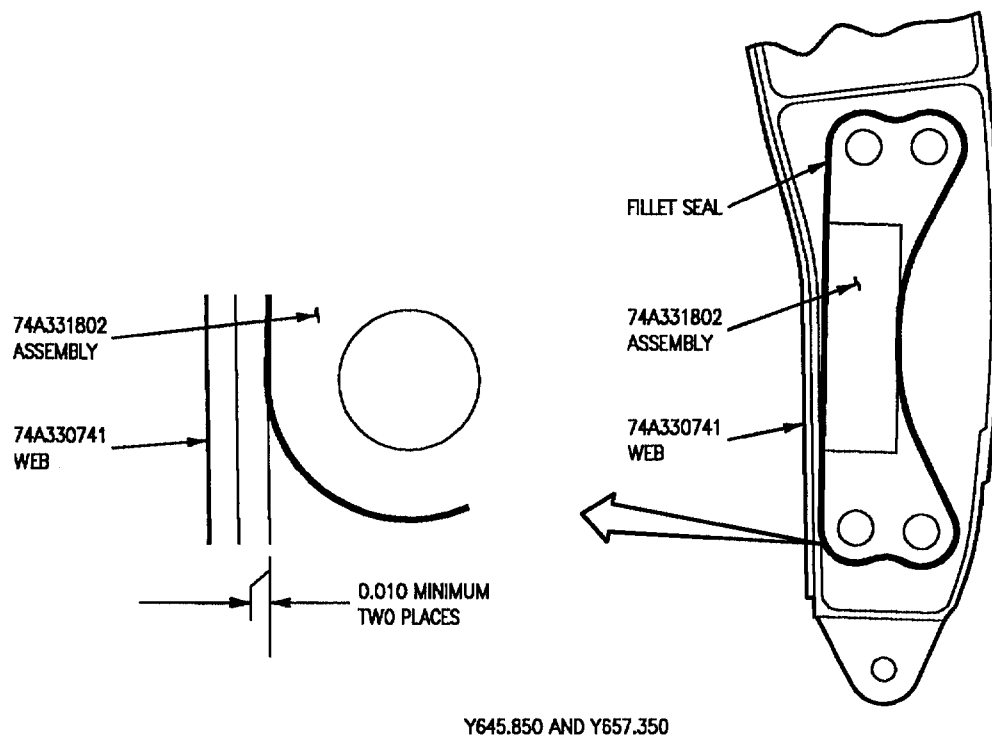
Spindle Assembly 74A331802 Replacement (Sheet 1)
